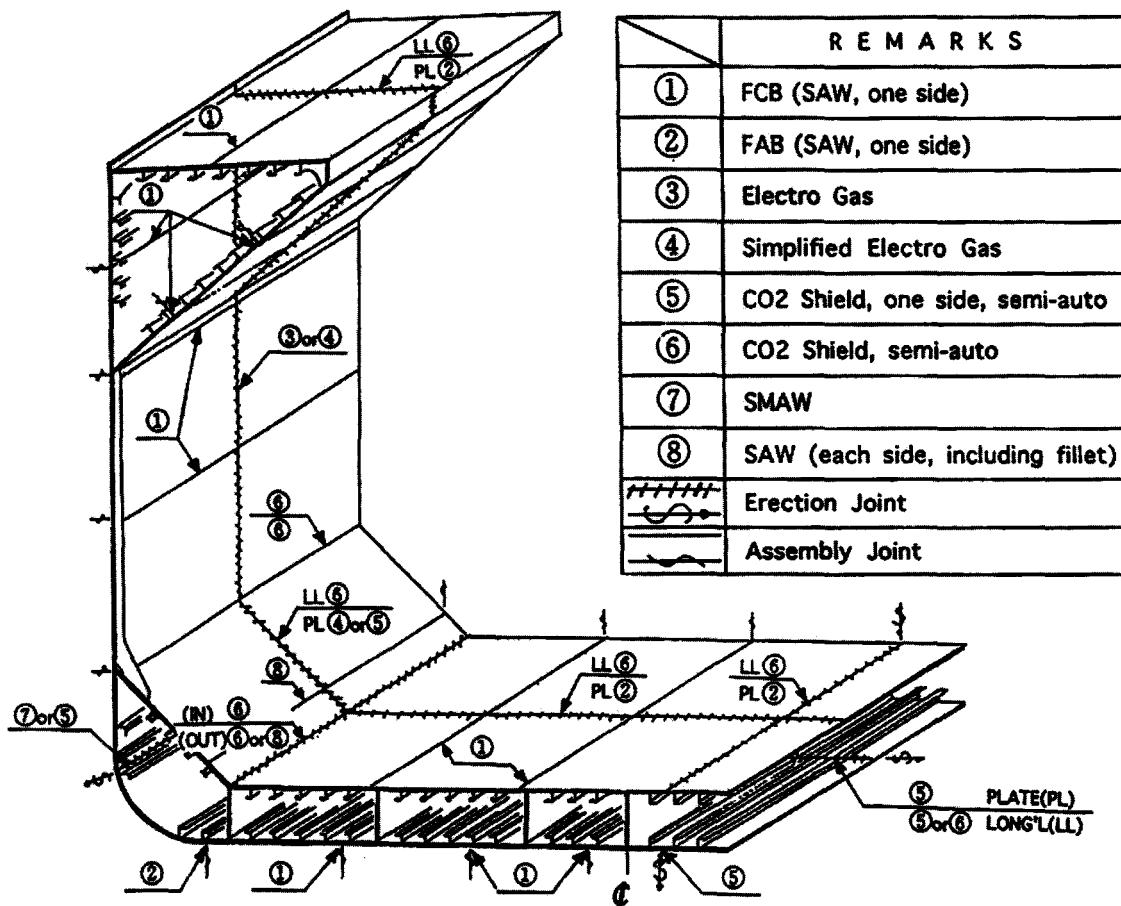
Typical Use of Welding Processes (16)
